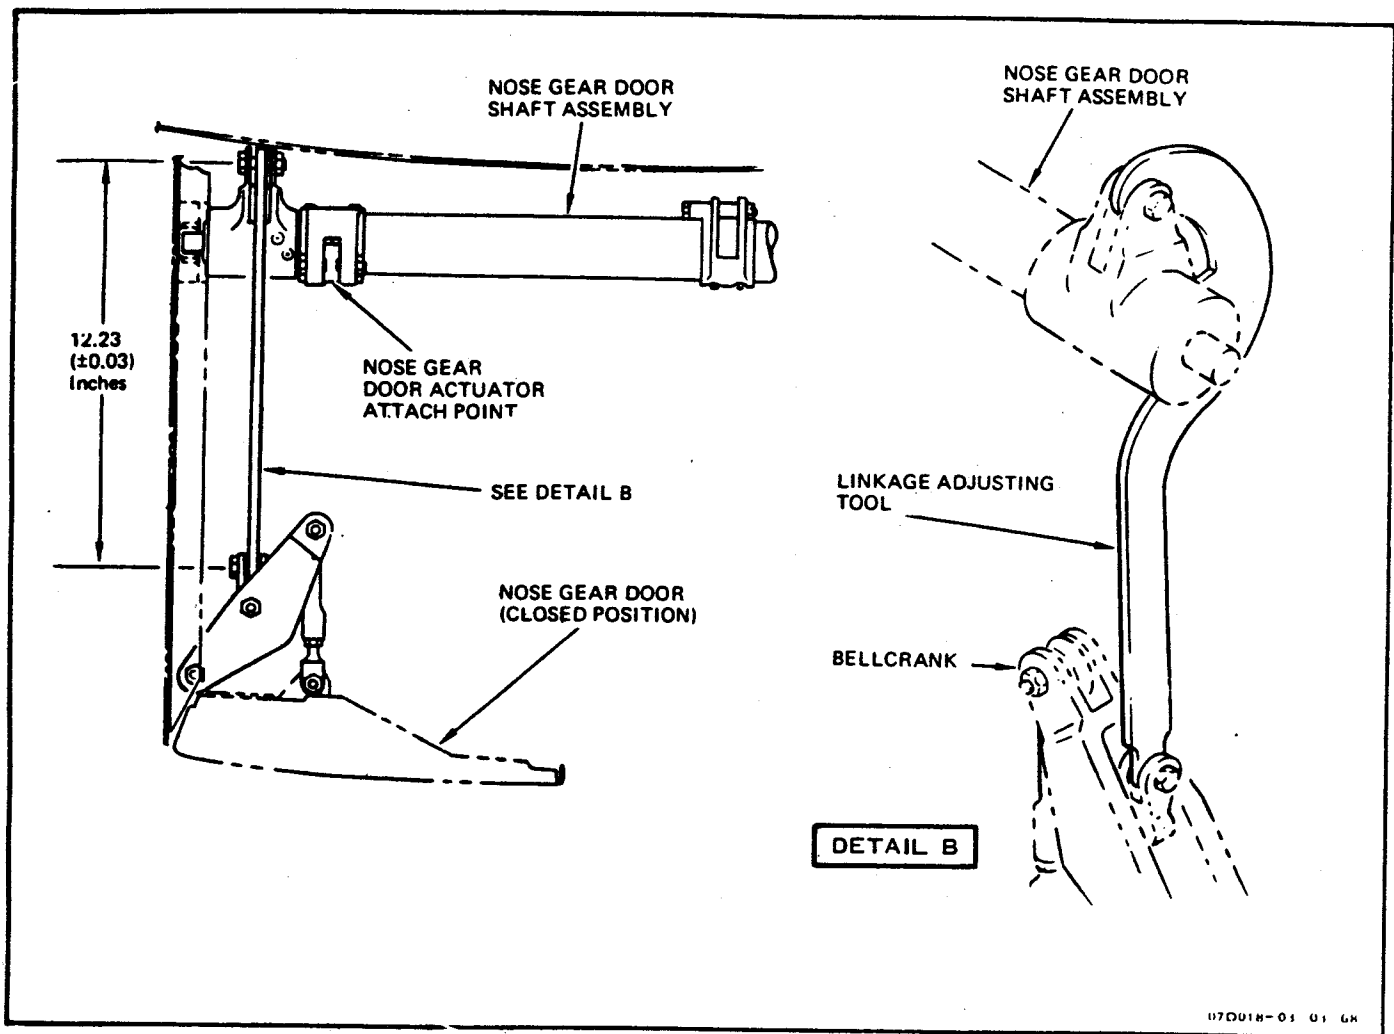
Nose Gear Door Shaft Removal and Installation (Sheet 3)
